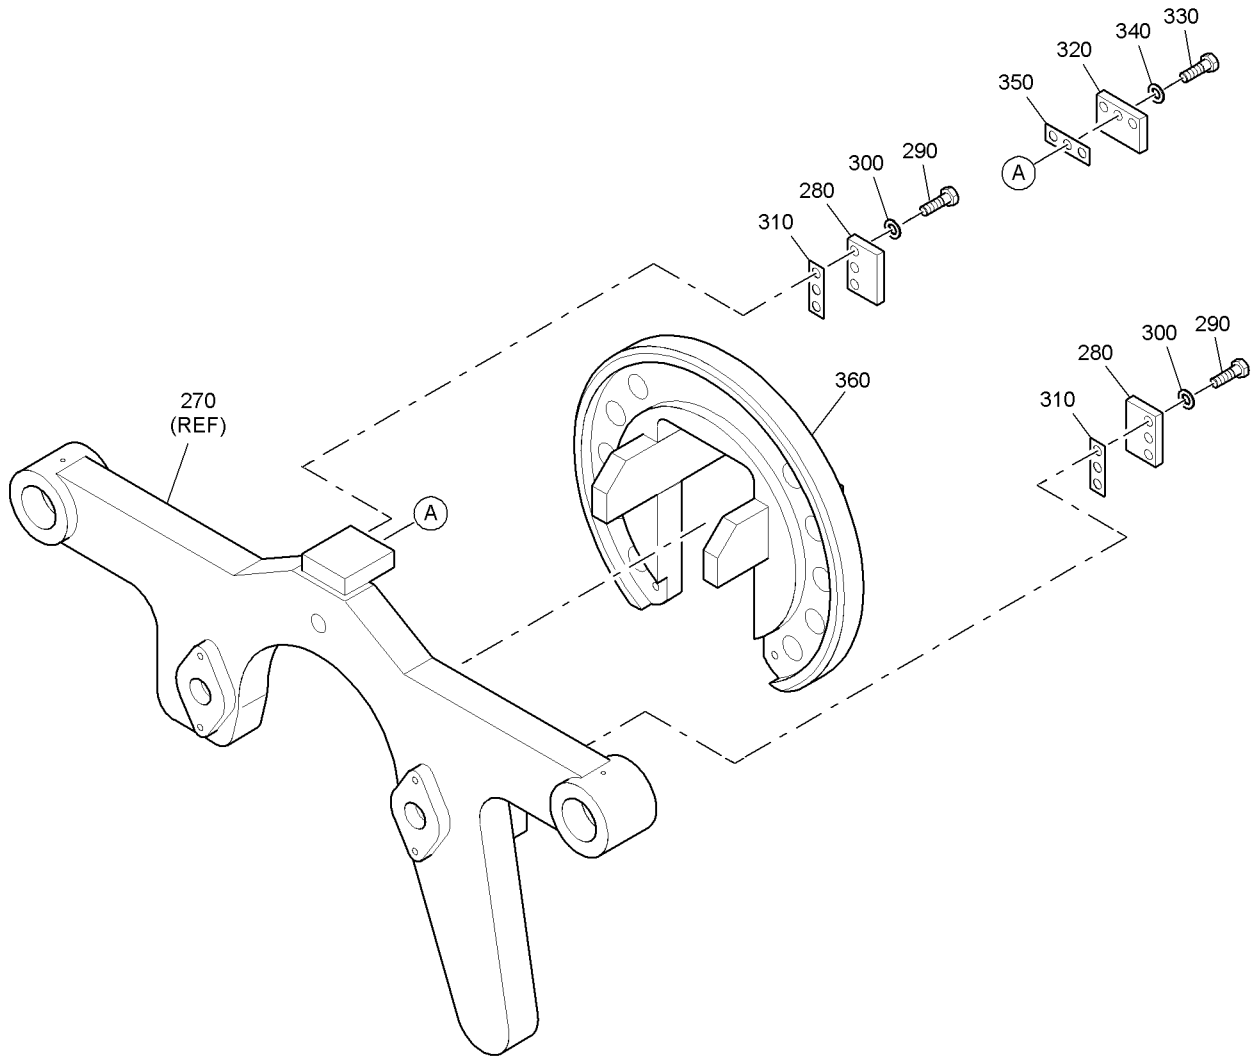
YOKE ASSEMBLY (SHEET 2 OF 2)
